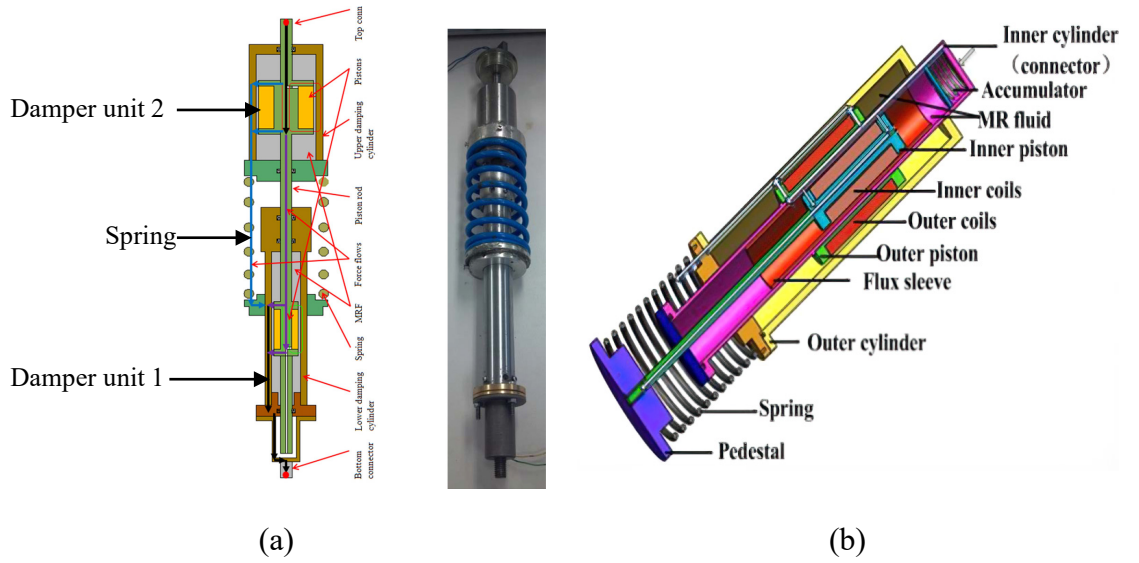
Design drawing and prototype of VSVD MR dampers with one spring. [15, 16]
